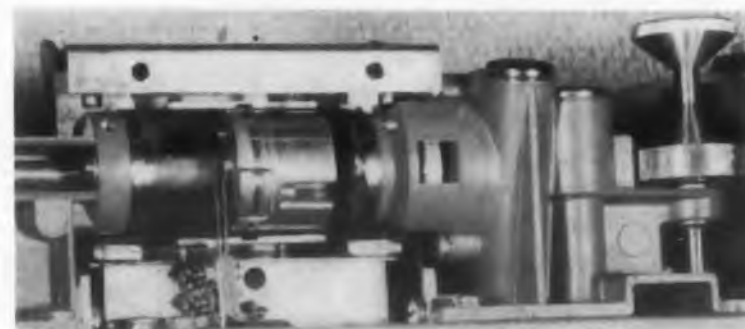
Underside view of the gate and head wheel assemblies. At the right may be seen the ratcheted tape drive capstan.
